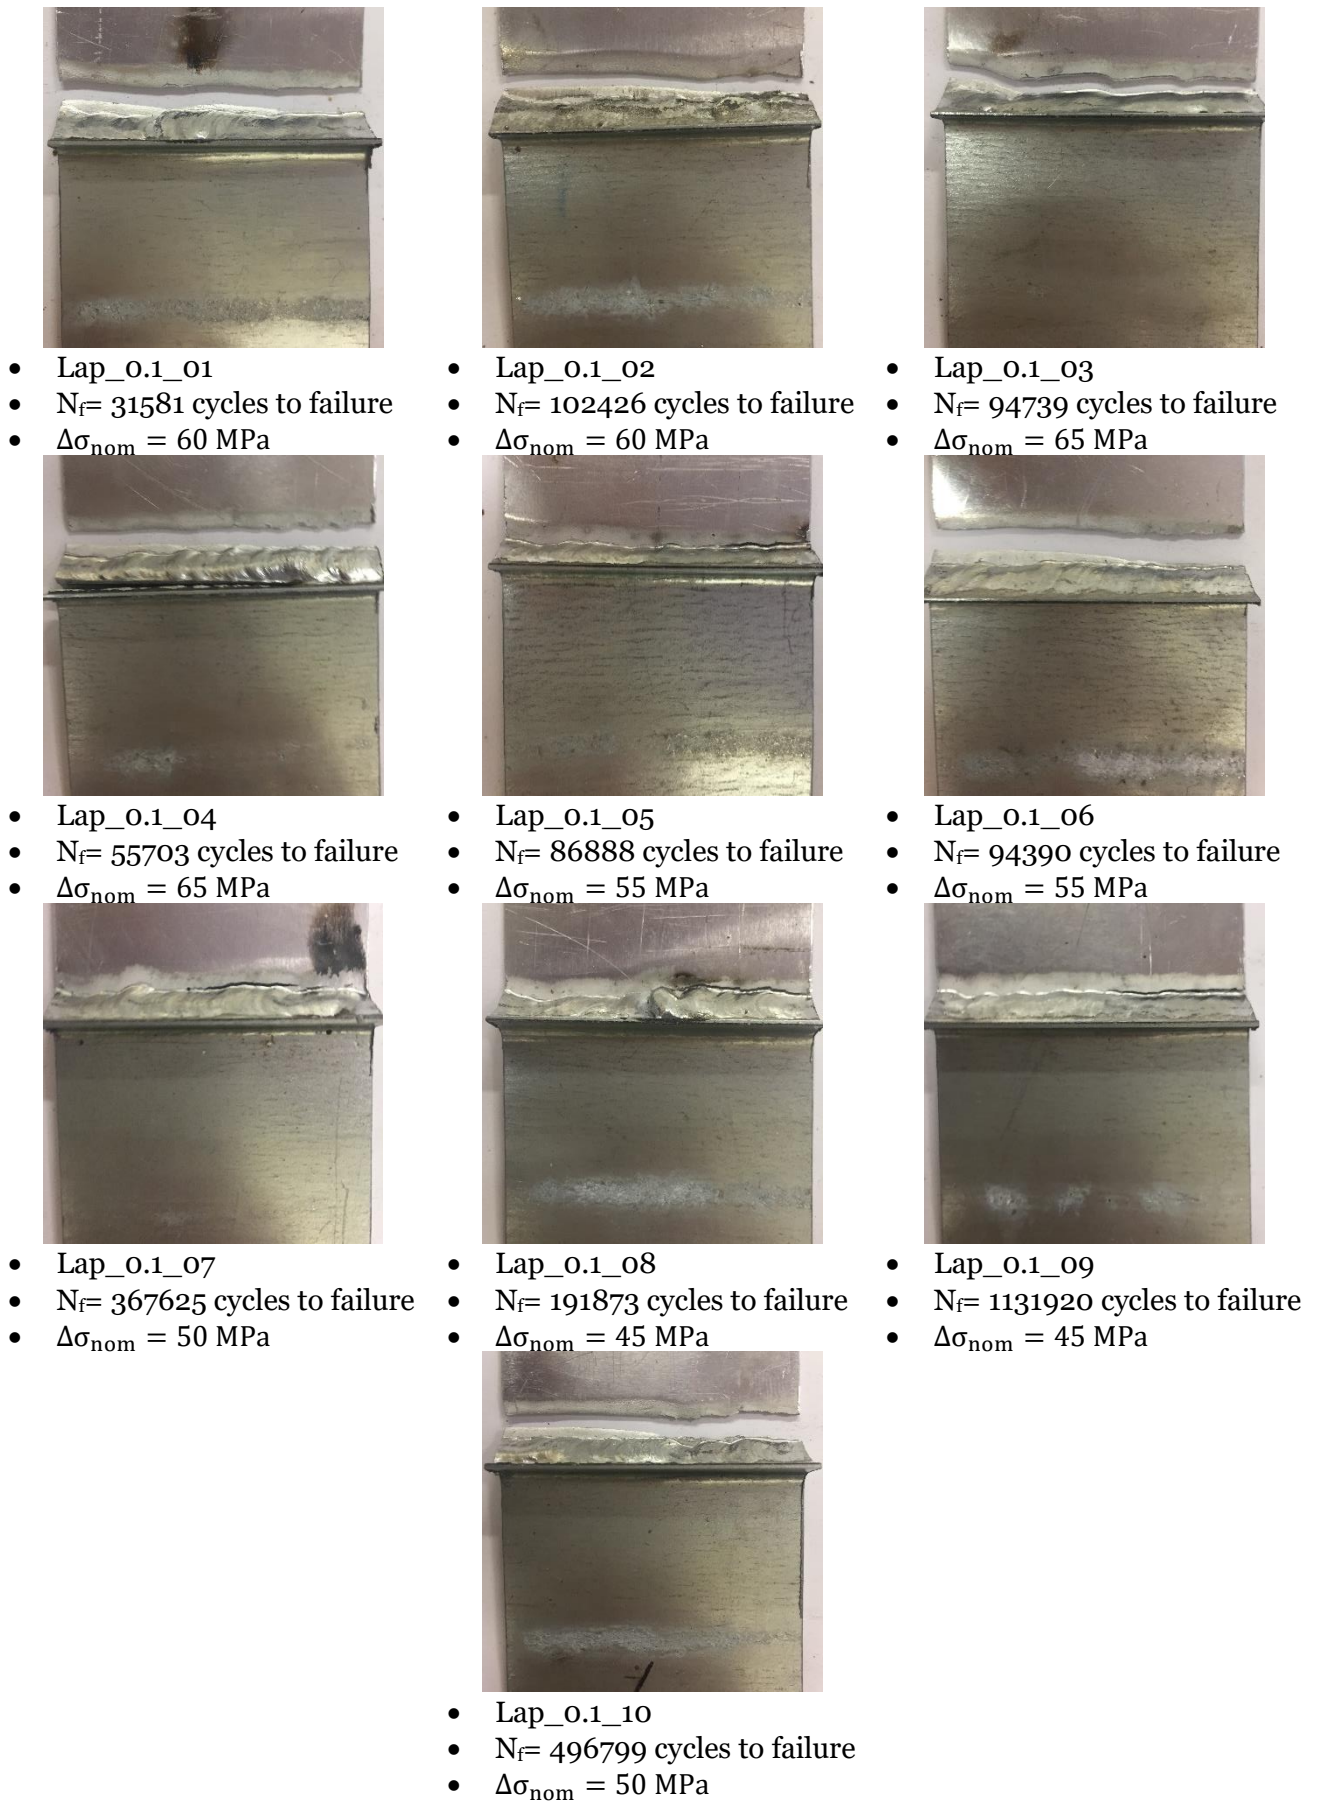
Fatigue failure of lap-welded joints with load ratio, $R=0.1$.
